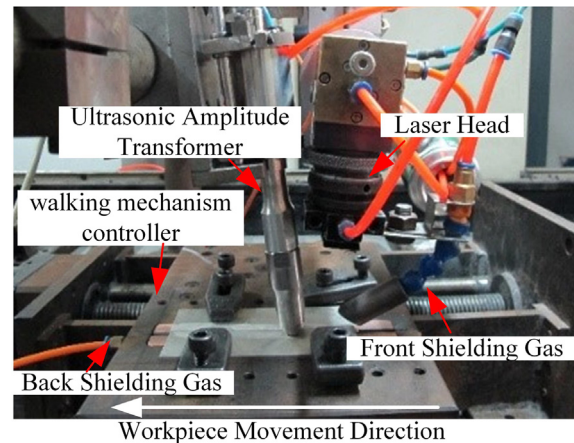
The test equipment of ultrasonic vibration-assisted laser welding.
